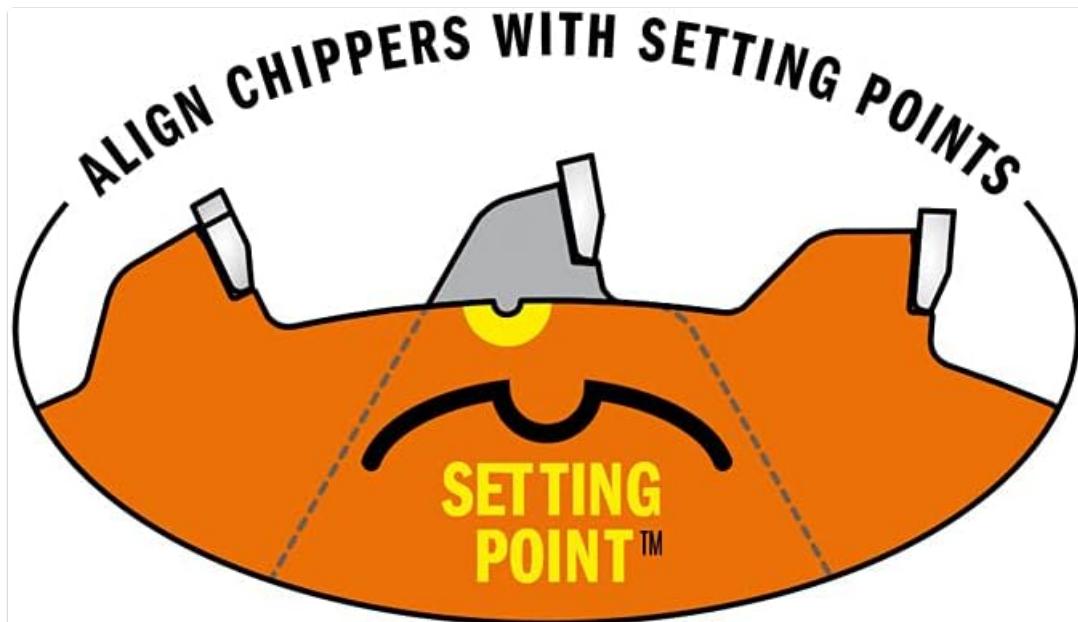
Diagram illustrating the "Setting Point" for proper alignment of chippers with the main blades.
